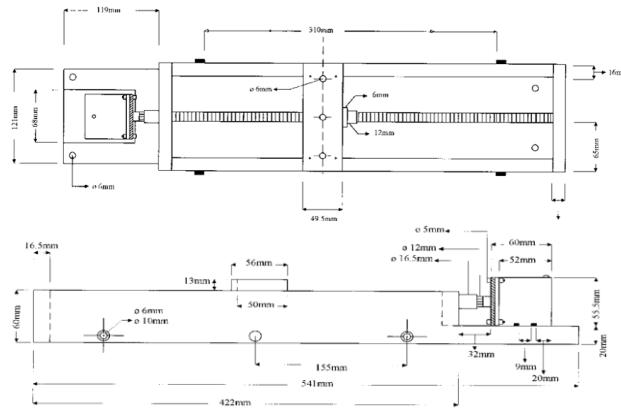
Top and left side technical drawings of the new design opto-mechanical system (drawn with AutoCAD).
